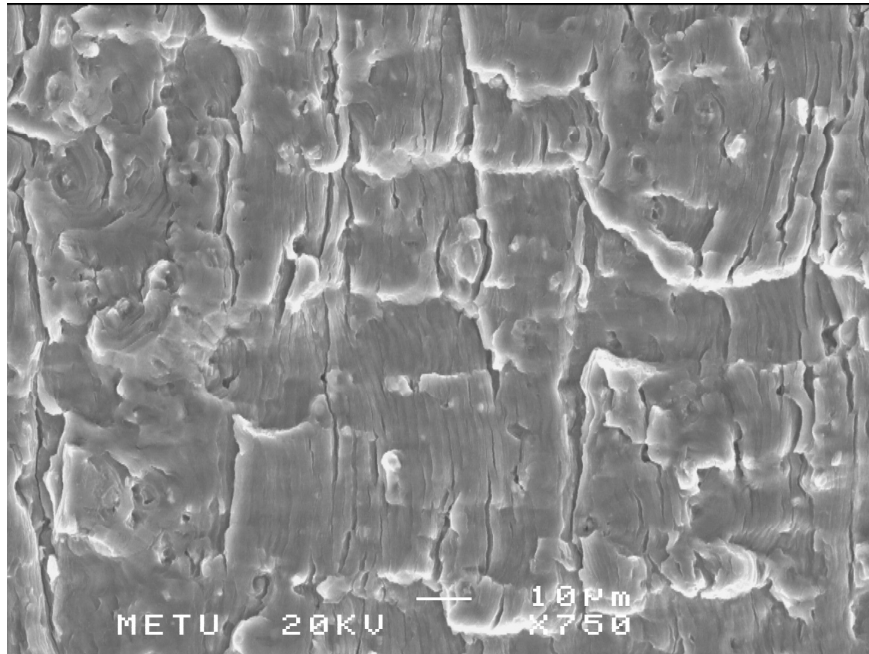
Dynamic Loading Specimen, Stage 2 fatigue fracture surface SEM image
